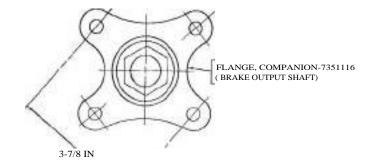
Brake output shaft bearing retainer assembly and hand brake--exploded view—Continued.
